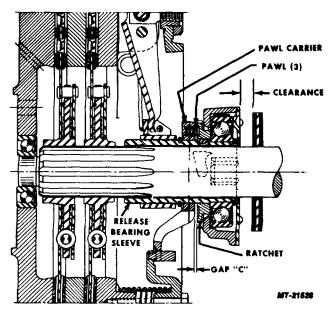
Release Bearing Adjustment (Lipe LPA Clutch) (Self-Adjuster Type)
